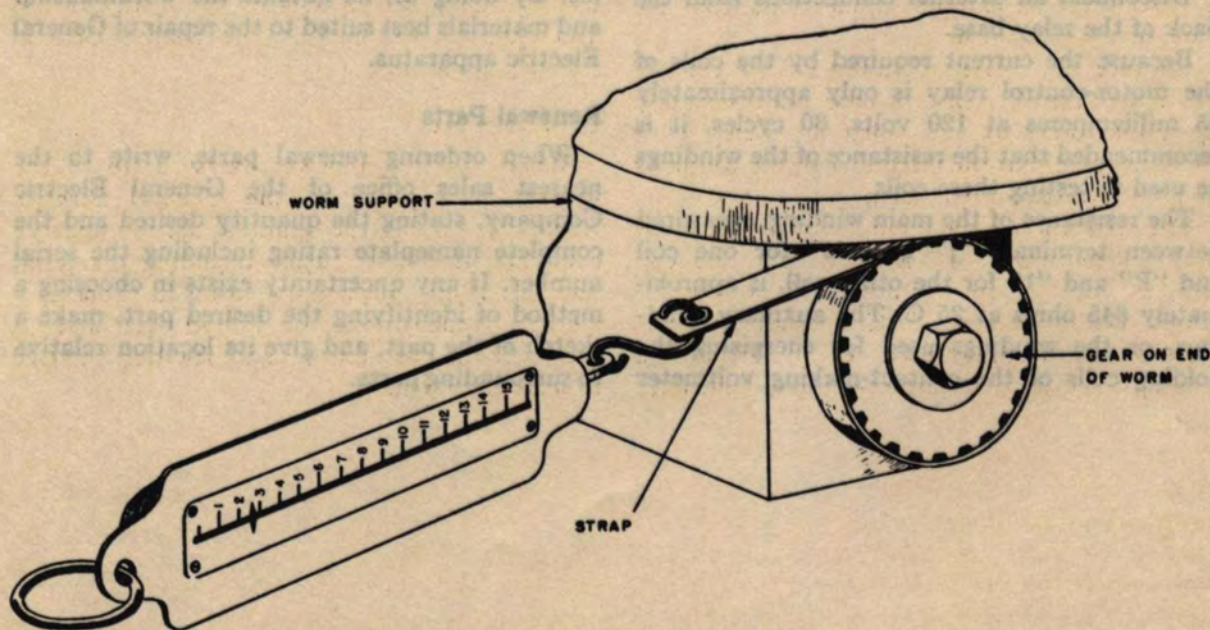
Method used to preload worm bearings, typical of large kva-size regulators
